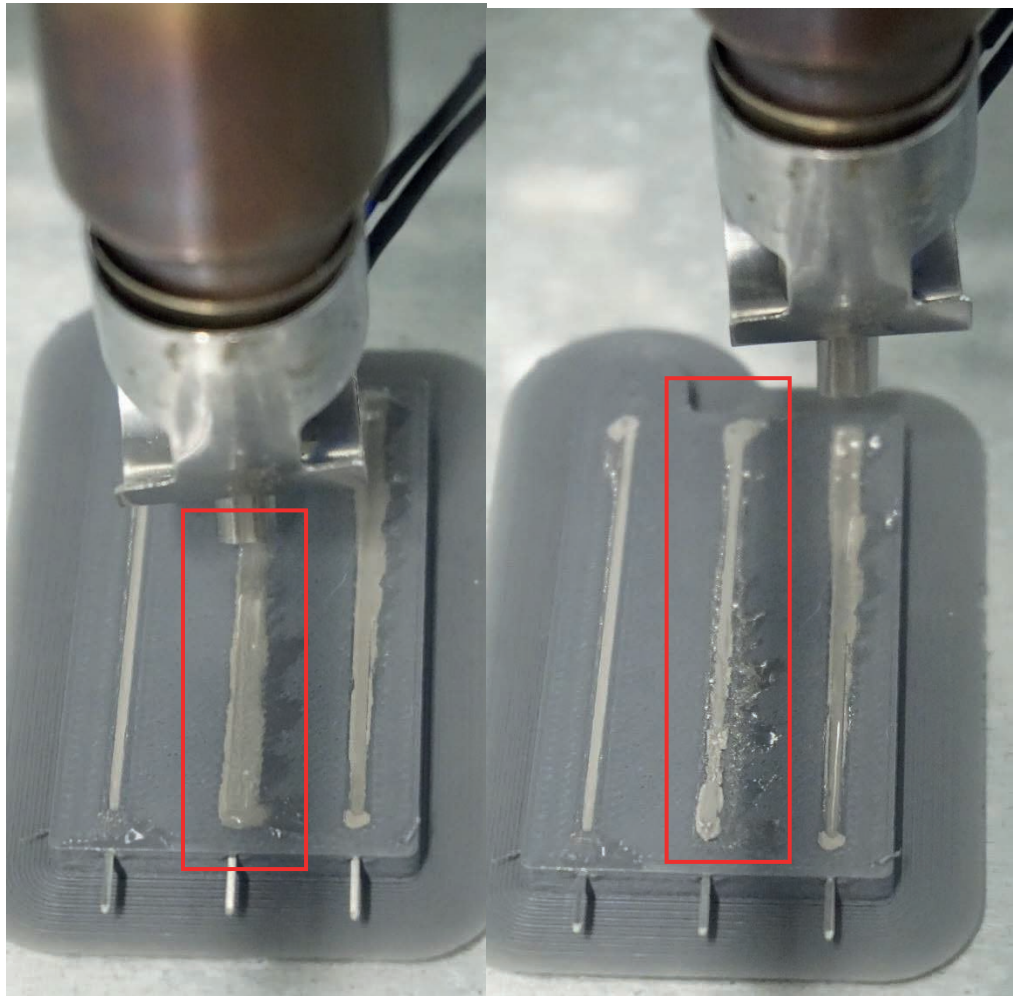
Marked with the red box (left) solder paste after the first curing step, (right) solder paste trace after the second curing step.
